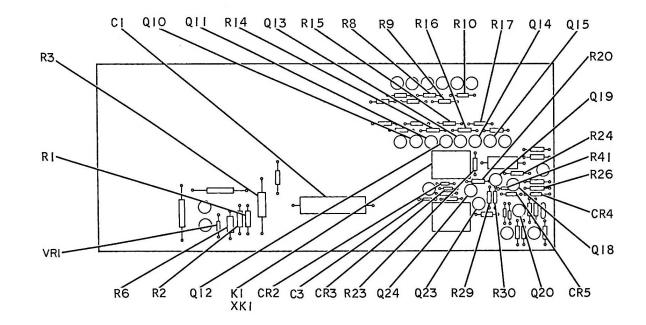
Lampdriver Board A9A1 (Sheet 1 of 2).
